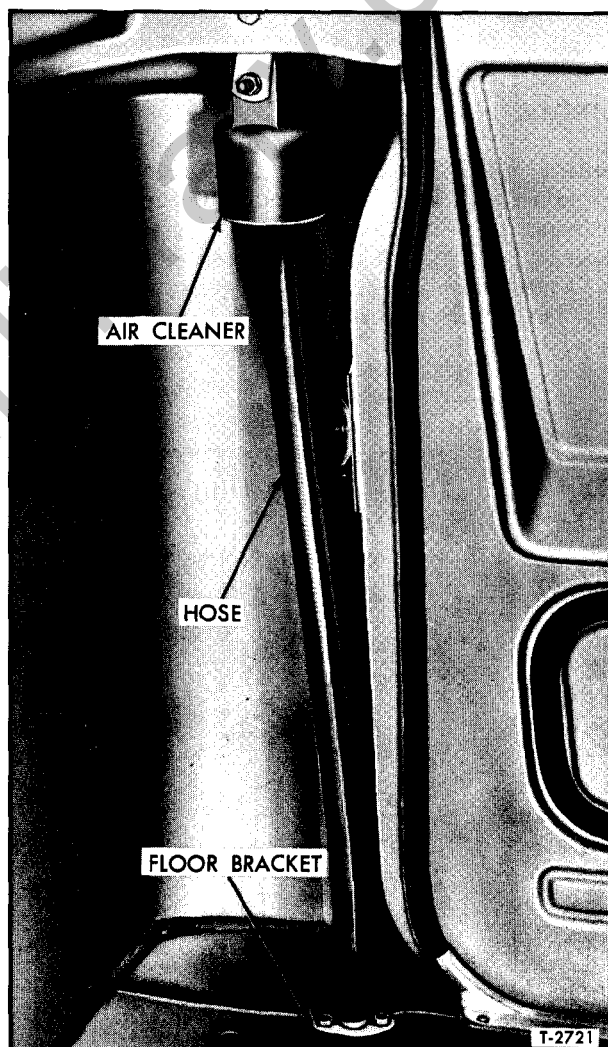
Power Cylinder Air Cleaner Installed (Conv. Cab)
